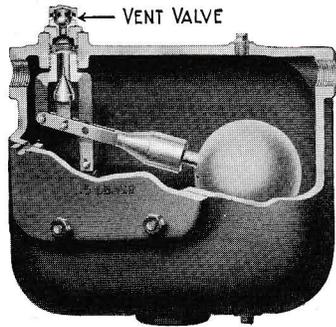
Sectional View of the Webster Vent Trap—Larger Sizes
